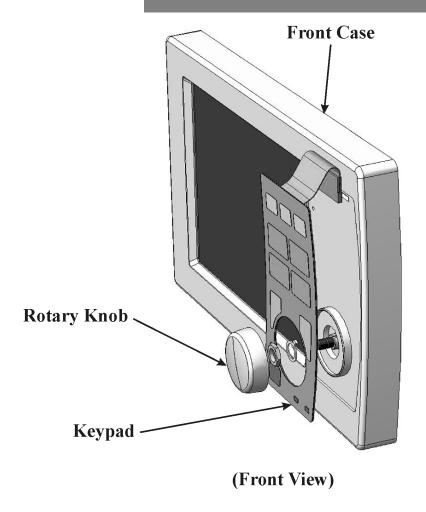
Monitor Front Bezel Assembly View B (Front)
